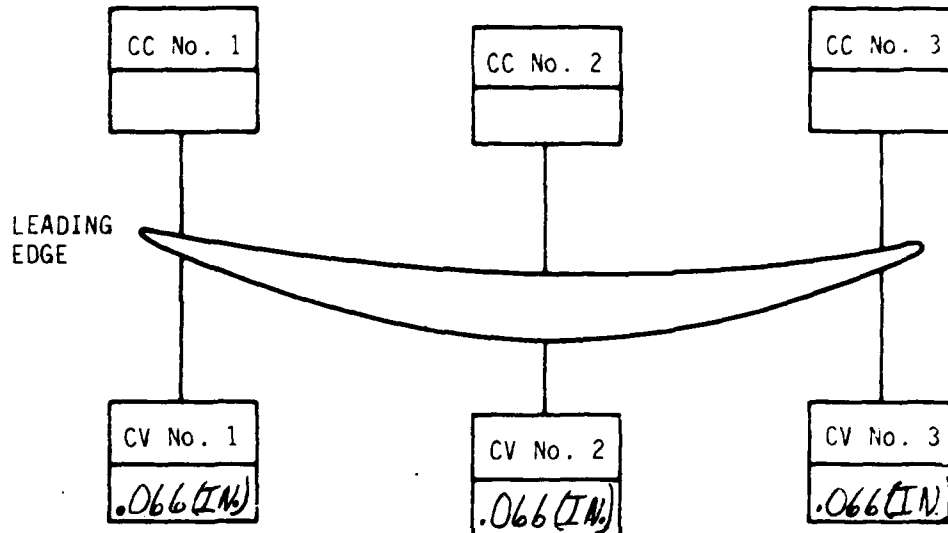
(Sheet 2 of 2). Typical Fillet Radius As-Milled on Stage 1 Blisk for Engine Testing.
